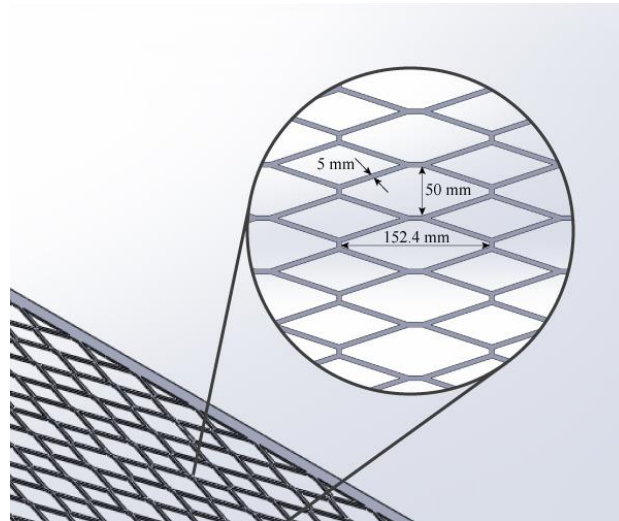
Structure and Dimensions of a Wire Mesh.
